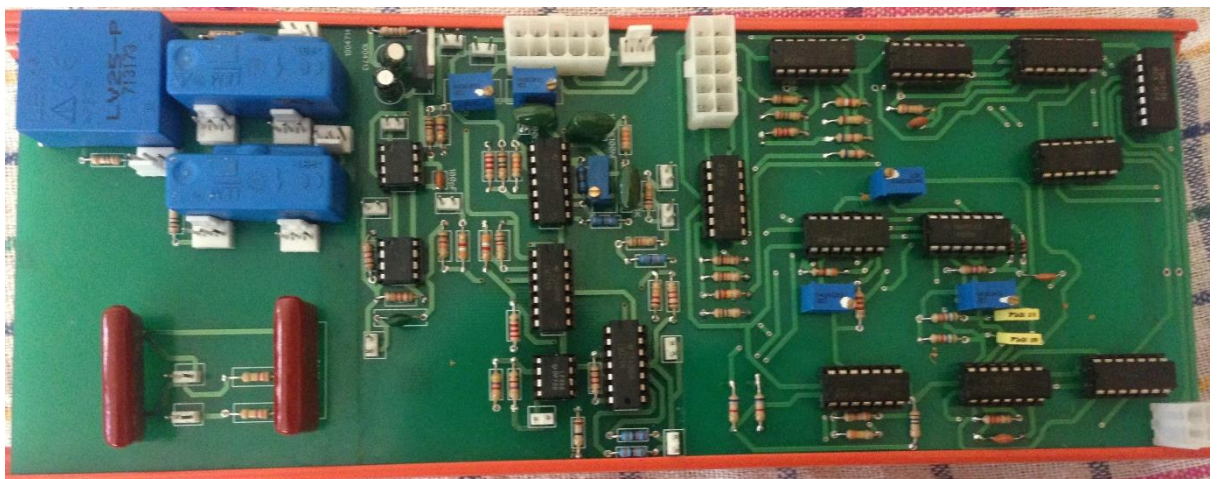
13: Photo of Complete STATCOM inverter (fully assembled) on UM100 PCB profile
